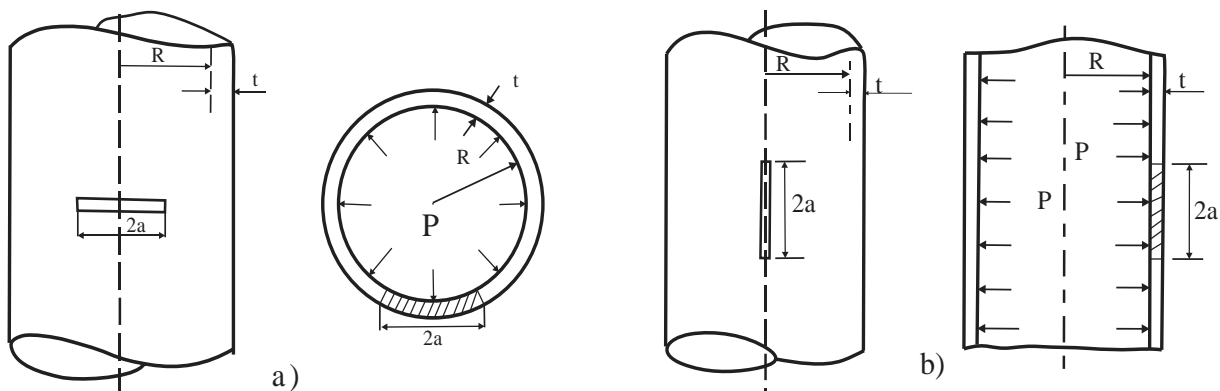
a) Circumferential crack and b) longitudinal crack configuration of welded joint
